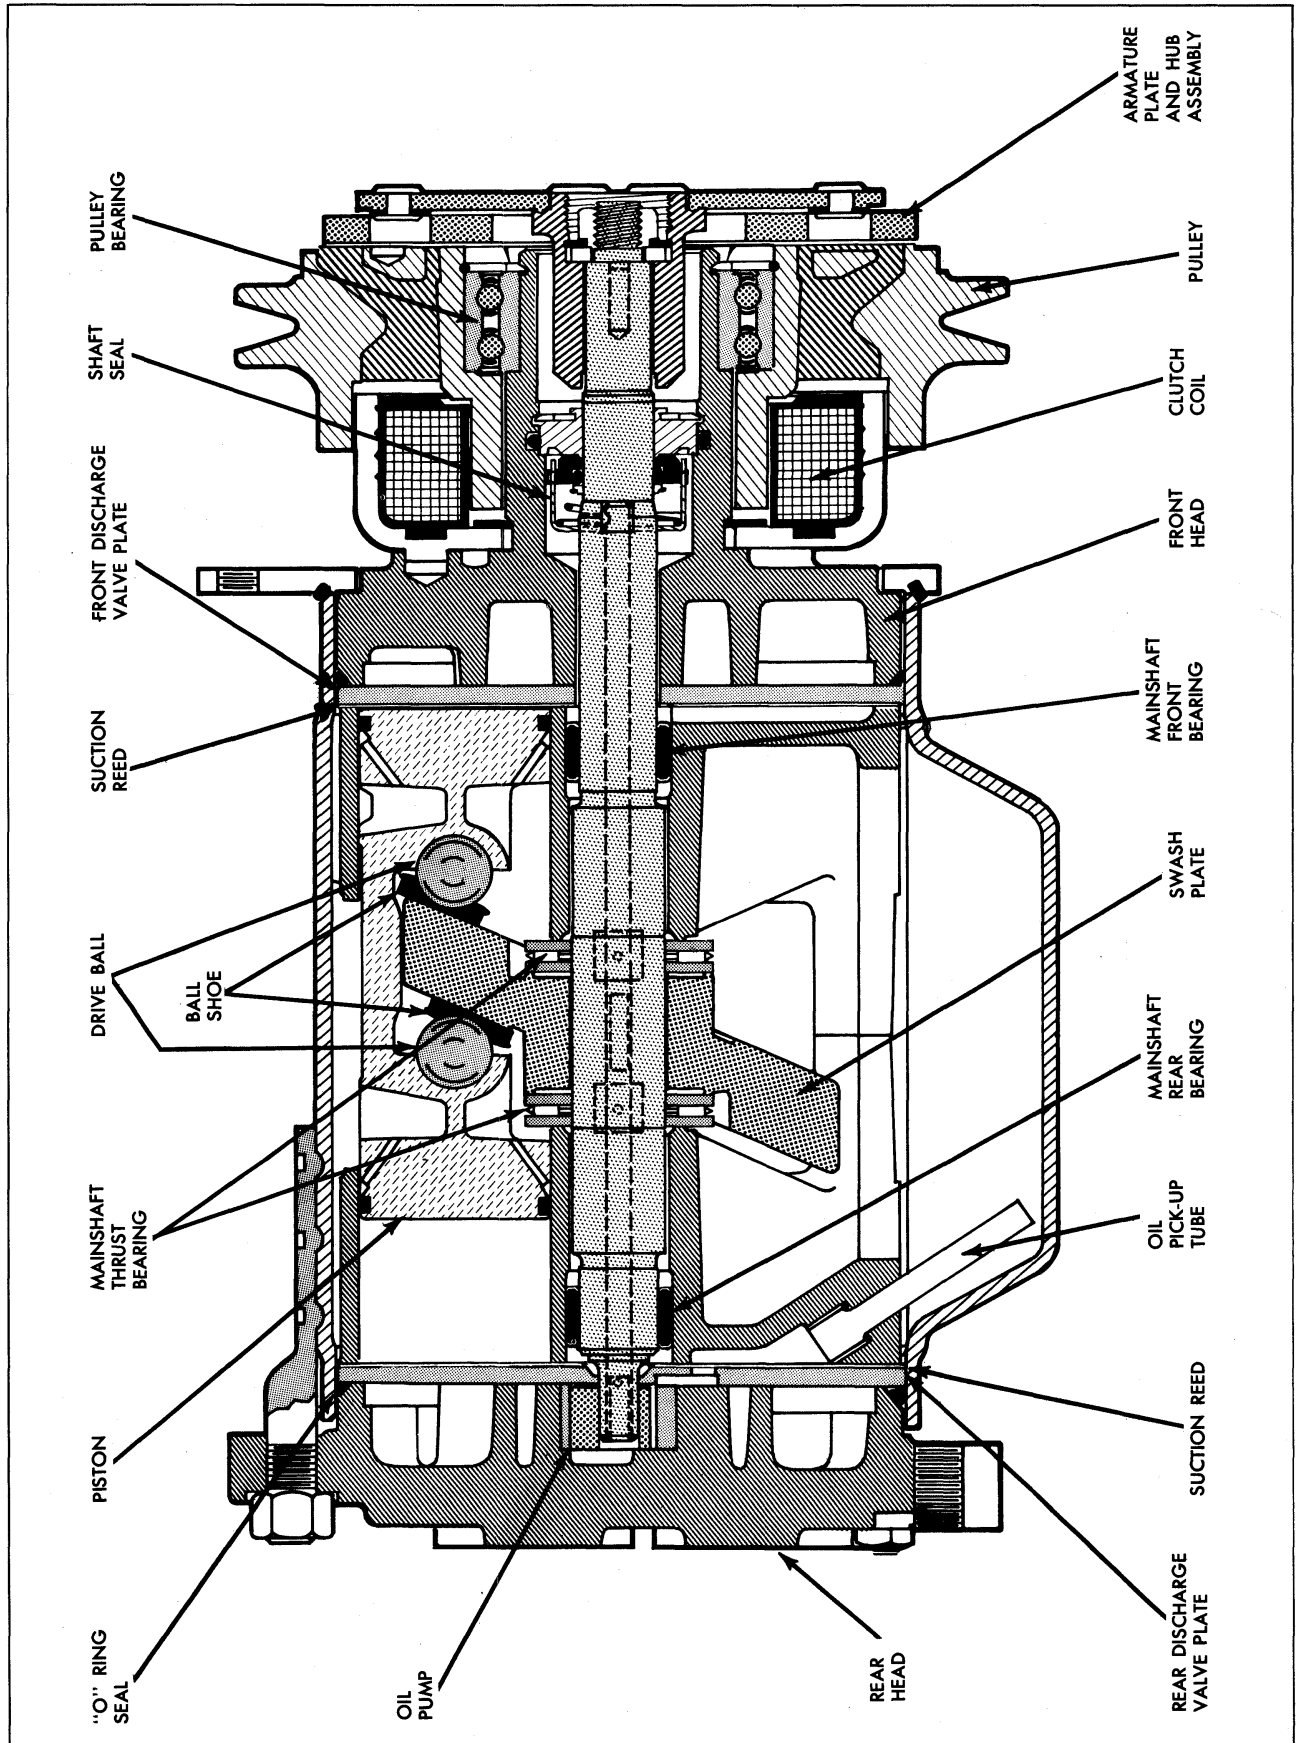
Cross Section - 6 Cylinder Compressor Assembly
